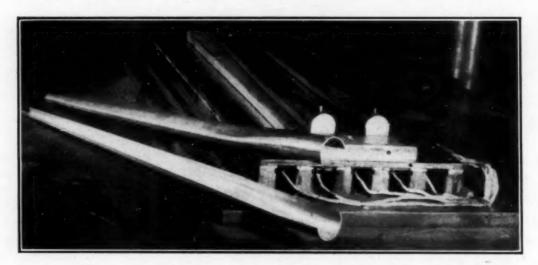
Electrically Heated Platen for Hot Rubber Forming Magnesium Alloy Sheet.
